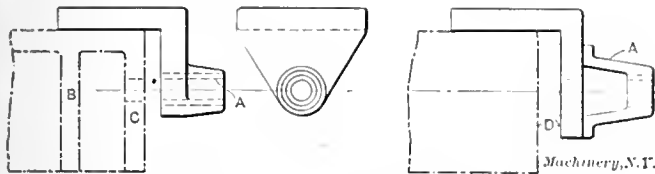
and 121. Examples of Guiding Arrangements where no Support is obtainable on One Side of Hole to be bored.
